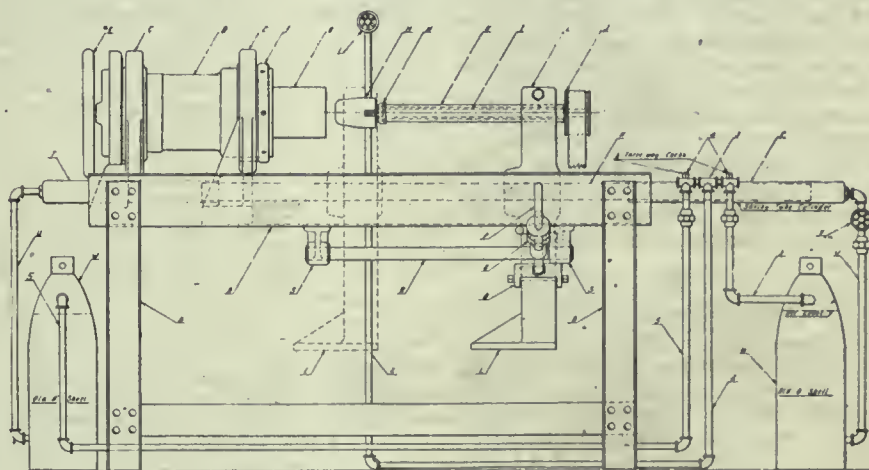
GRINDING BORE OF 6-IN. SHELL.
